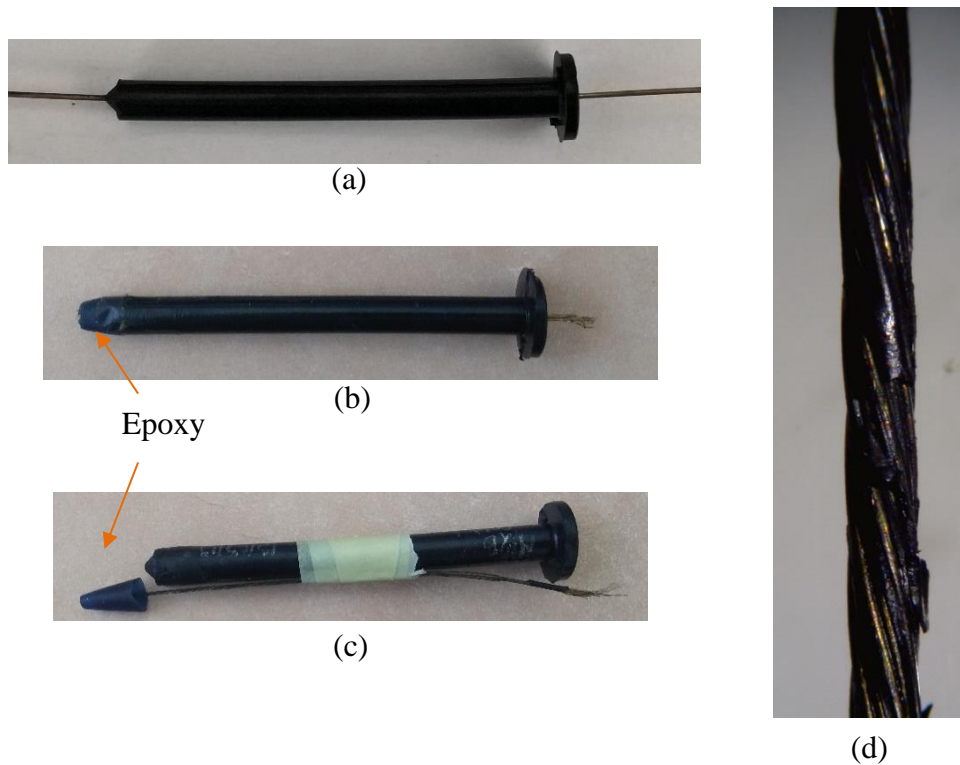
(a) Test specimen with twisted cable strands bonded to rubber (b) test specimen sealed with epoxy at the end (c) fractured test specimen (d) fractured cable.
